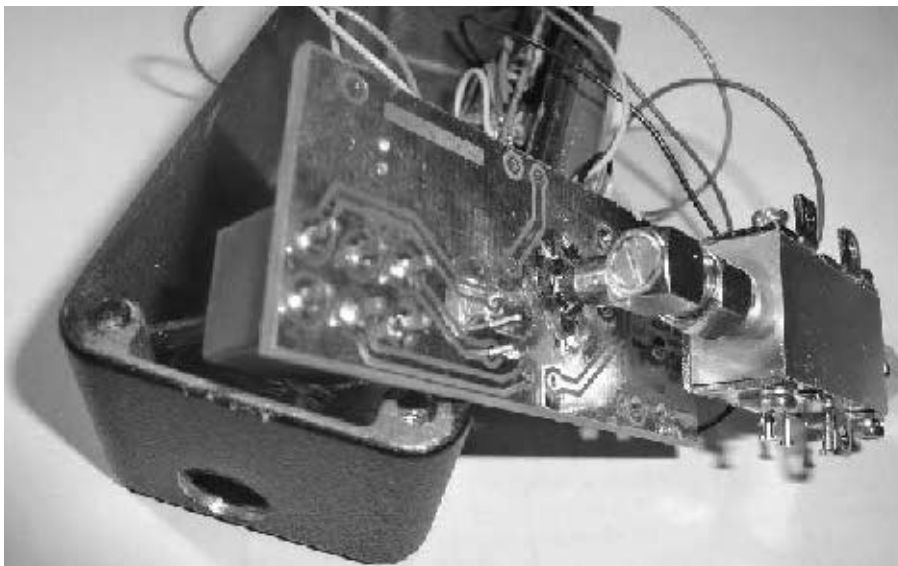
I had to insert a ¼ inch length of 141 coax into right angled SMA connector, to provide clearance between the detector and the circuit board. The coax (shield and center conductor) should not be soldered to the SMA until the very end.
